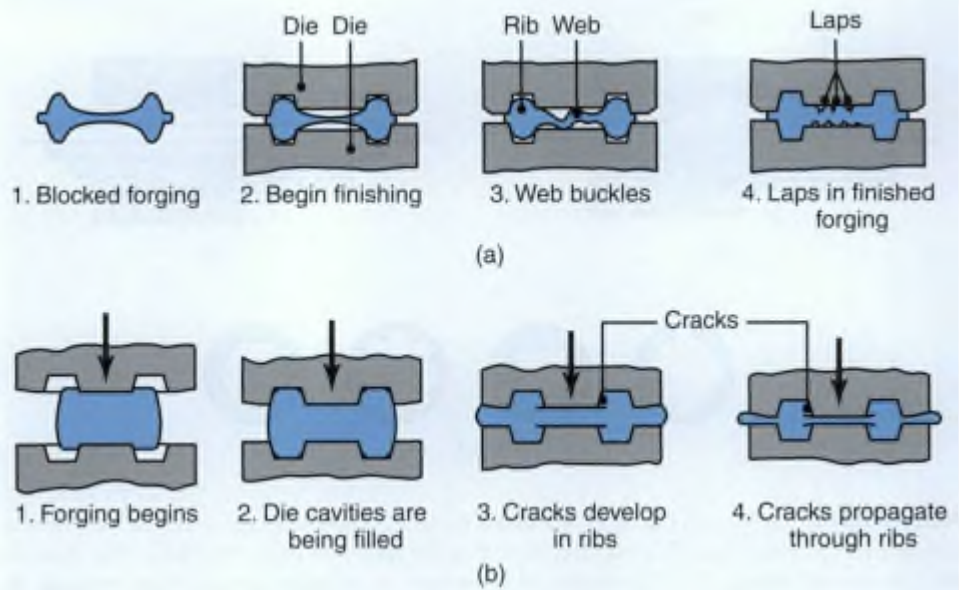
Examples of defects in forged parts. (a) Laps due to web buckling during forging; web thickness should be increased to avoid this problem. (b) Internal defects caused by an oversized billet; die cavities are filled prematurely, and the material at the center flows past the filled regions as the dies close.
